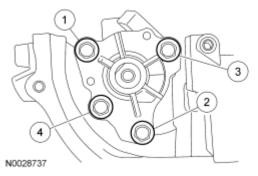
Identifying Oil Pump Bolts Tightening Sequence Courtesy of FORD MOTOR CO.
